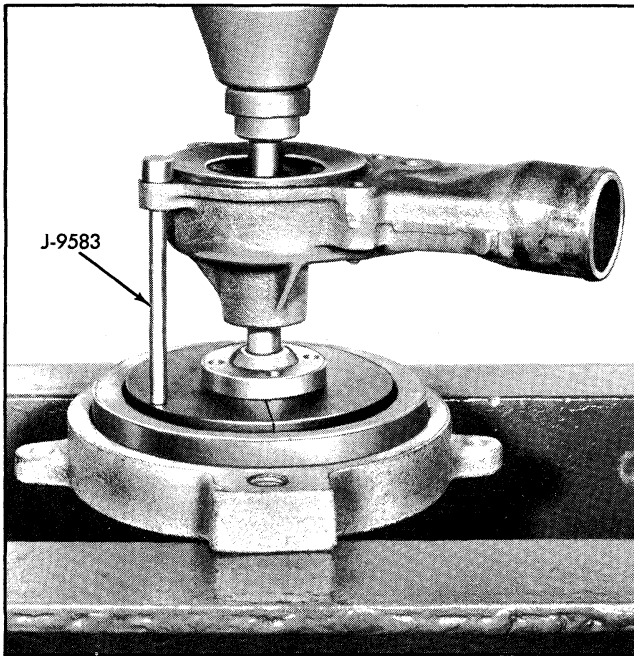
A-25 Installing Fan Hub Using Locating Tool J-9583
